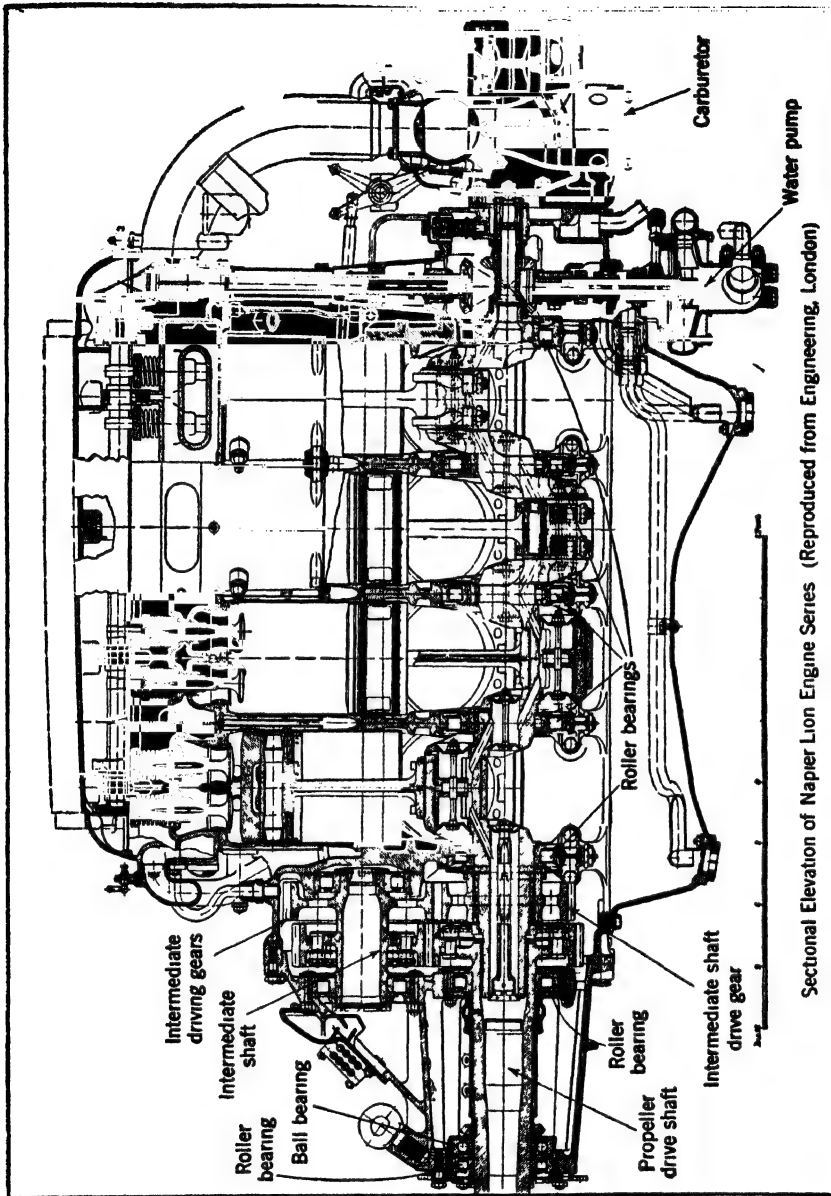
Crankshaft Assembly of Foreign Aviation Engine Showing Anti-Friction Bearings Installed on Main Journals.
